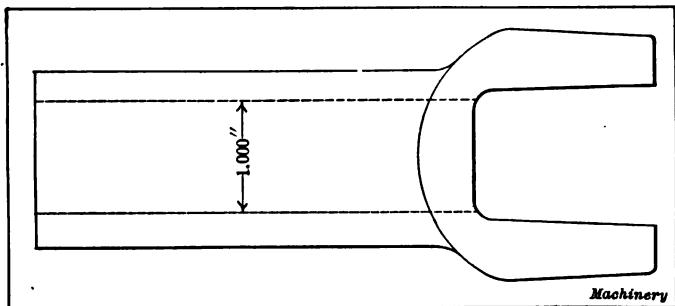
Slip-hub in which the Round Hole is finished by broaching
